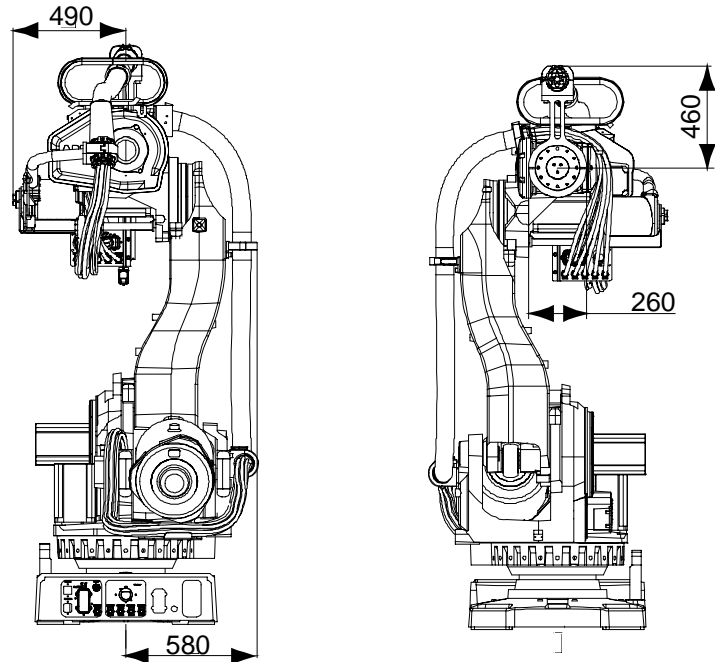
Routing for TypeS/Se, spot welding version (dimensions in mm).
